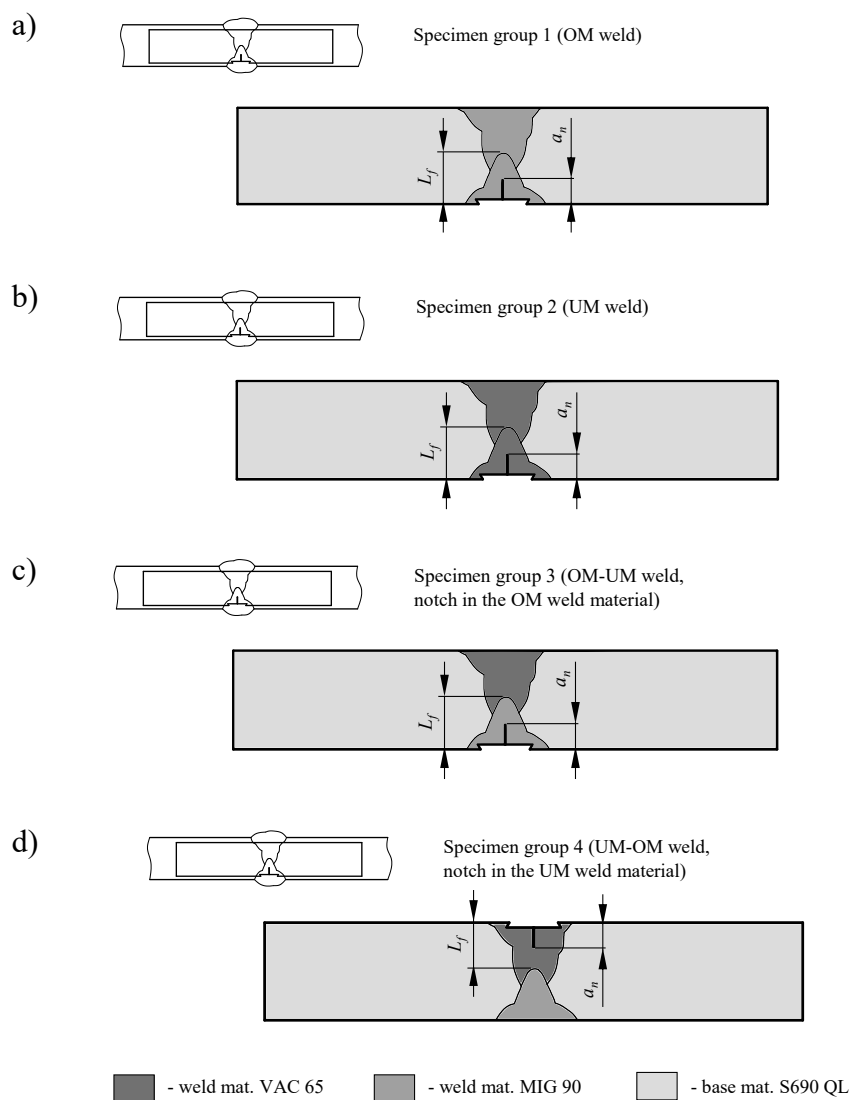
The configurations of the SE(B) specimens that were extracted from a) the OM weld material, b) the UM weld material, c) the OM-UM weld with a notch located in the OM weld material and d) the UM-OM weld with a notch located in the UM weld material.
